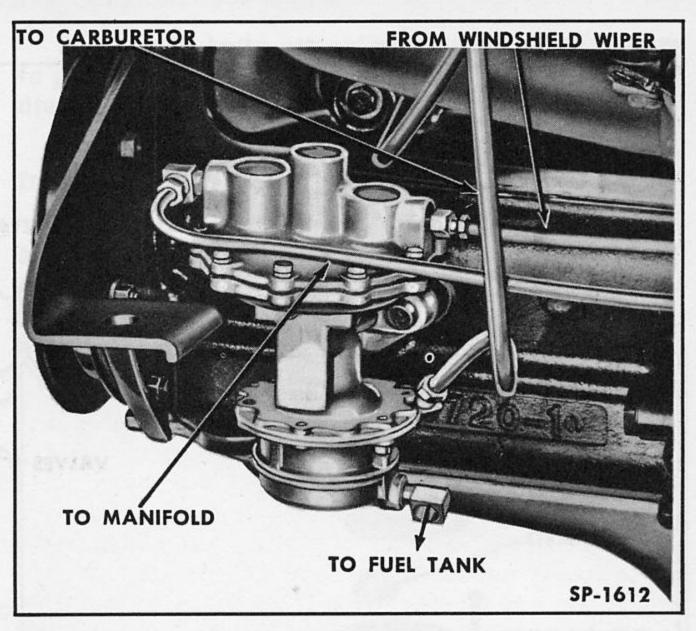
Fuel and Vacuum Pump Mounting (6 Cylinder Shown)
